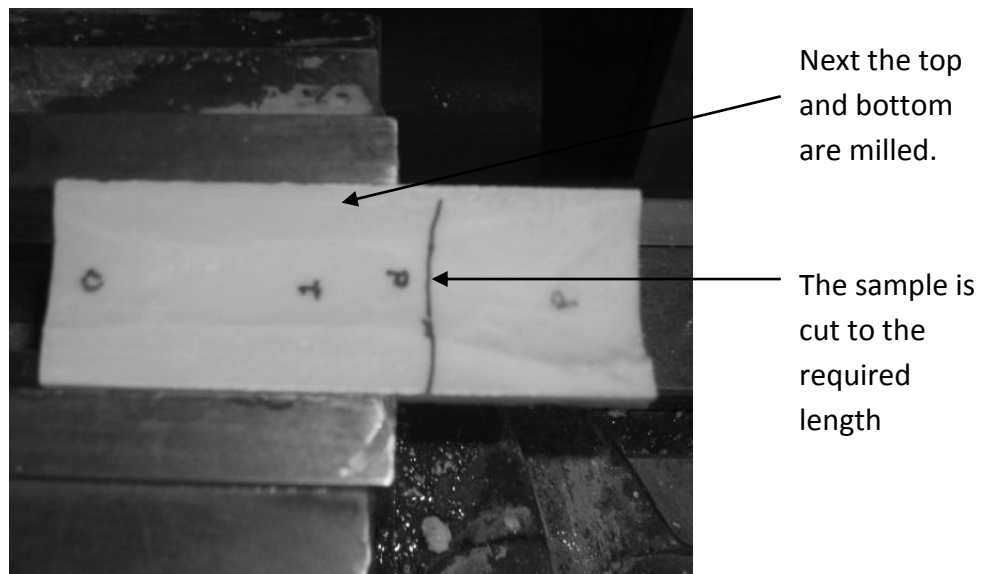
The top and bottom surfaces of the bone sample are milled.
